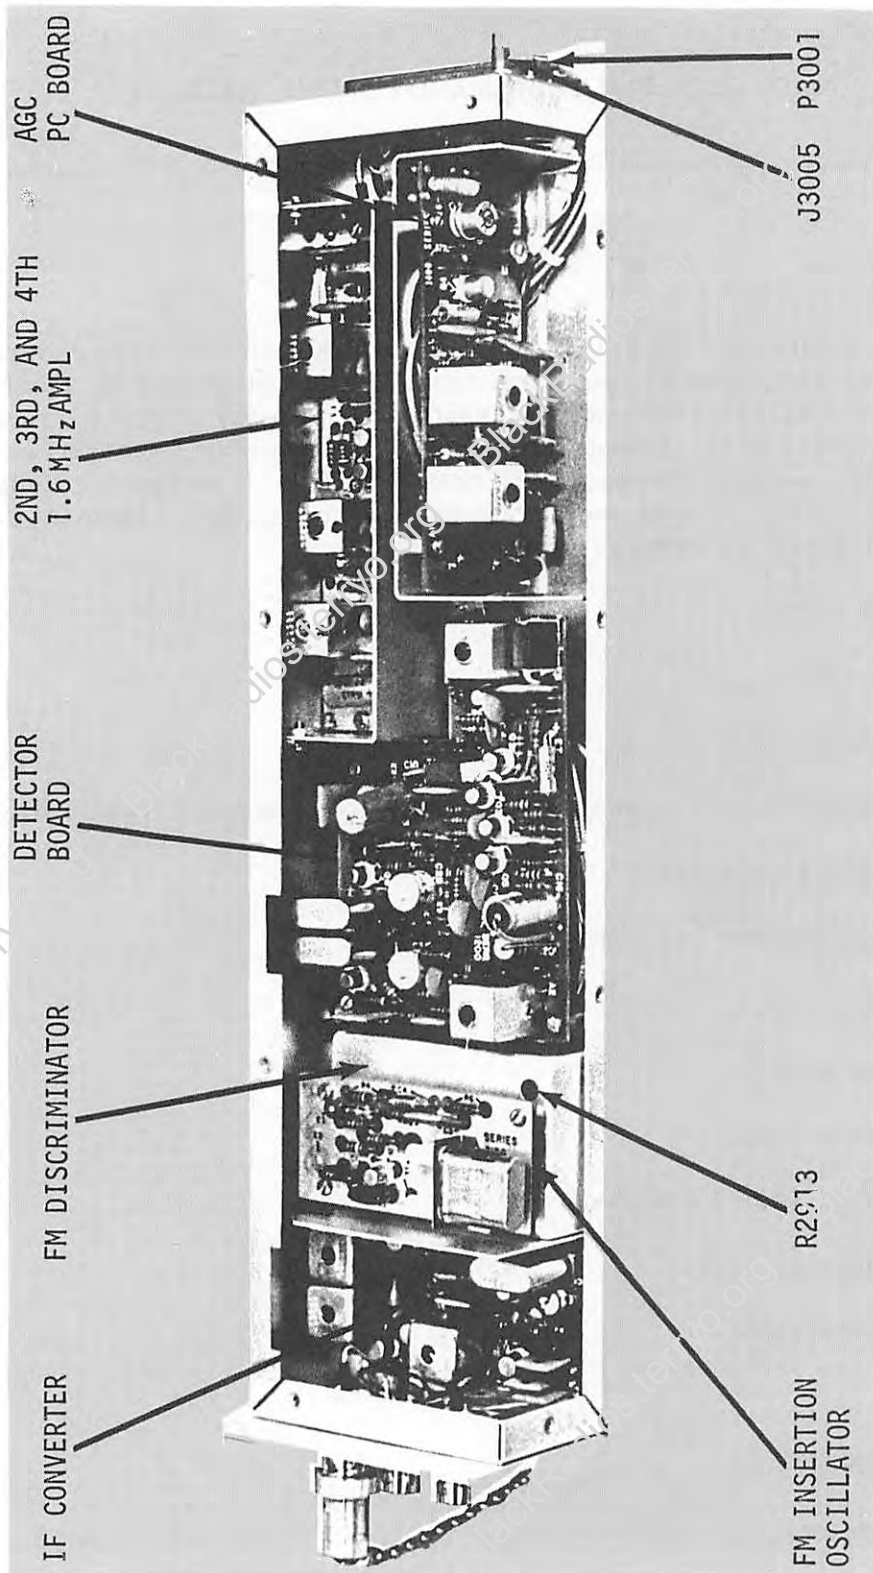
IF ASSEMBLY, COVER REMOVED
